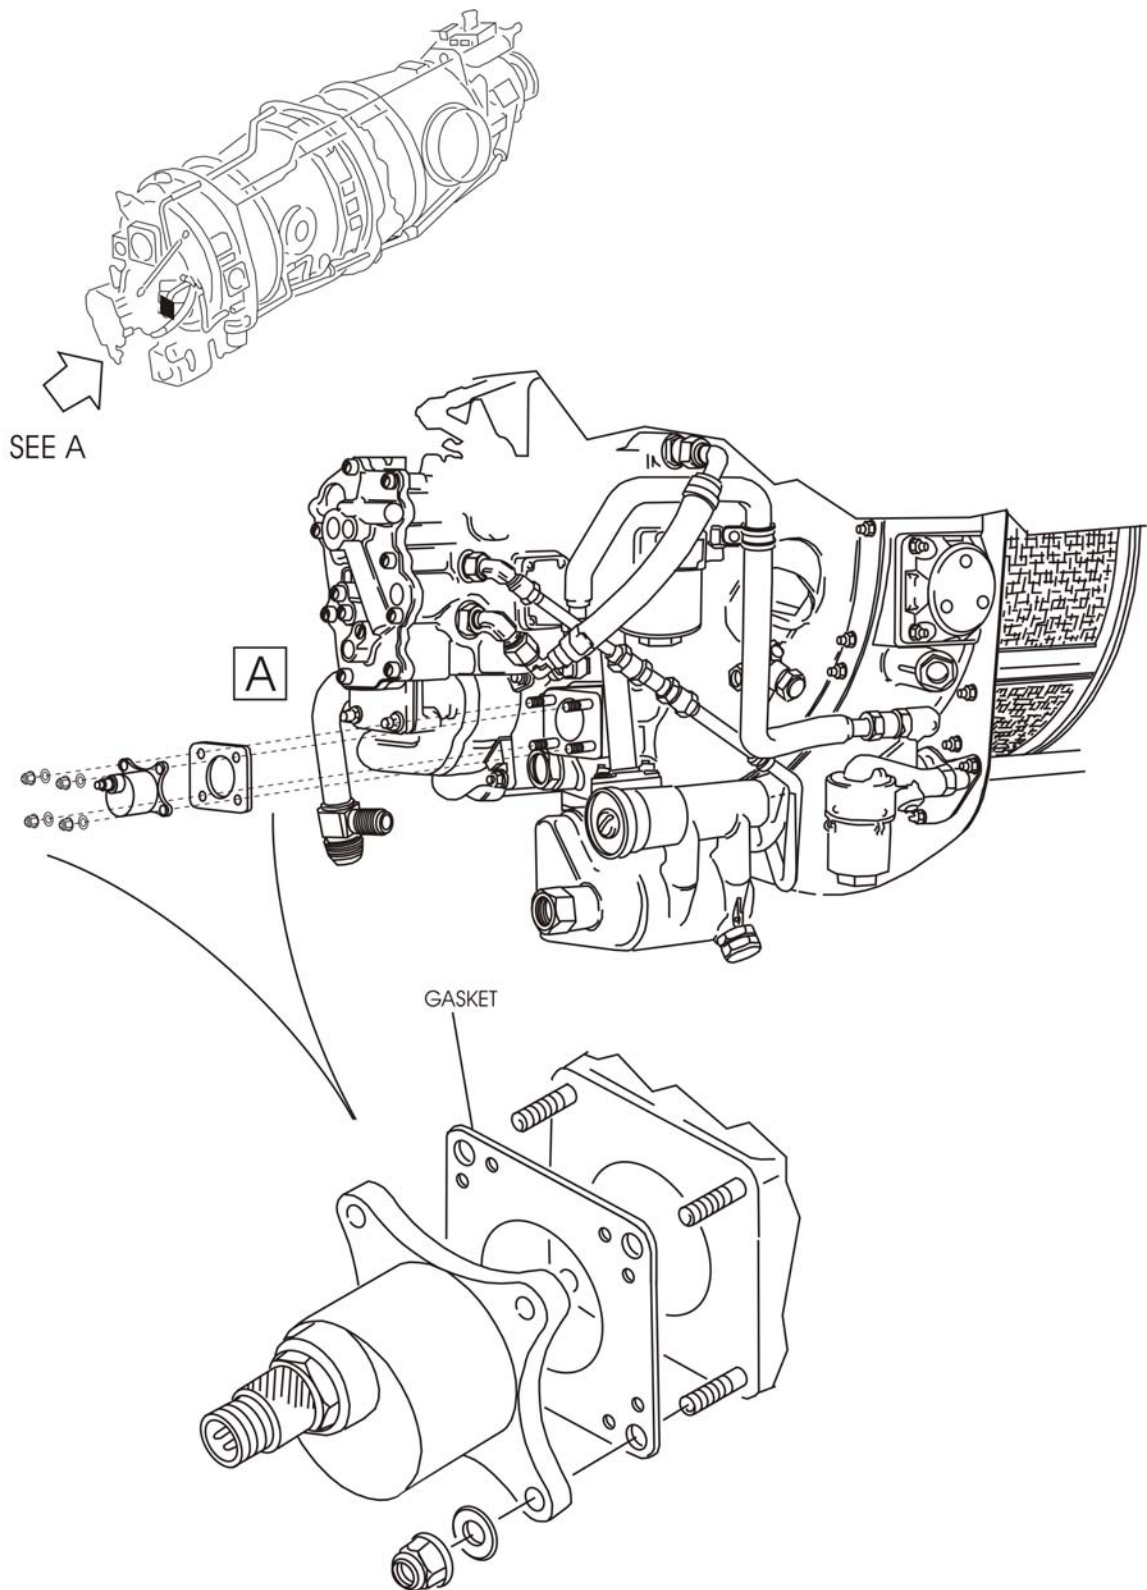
Engine Tachometer Generator - Removal and Installation
